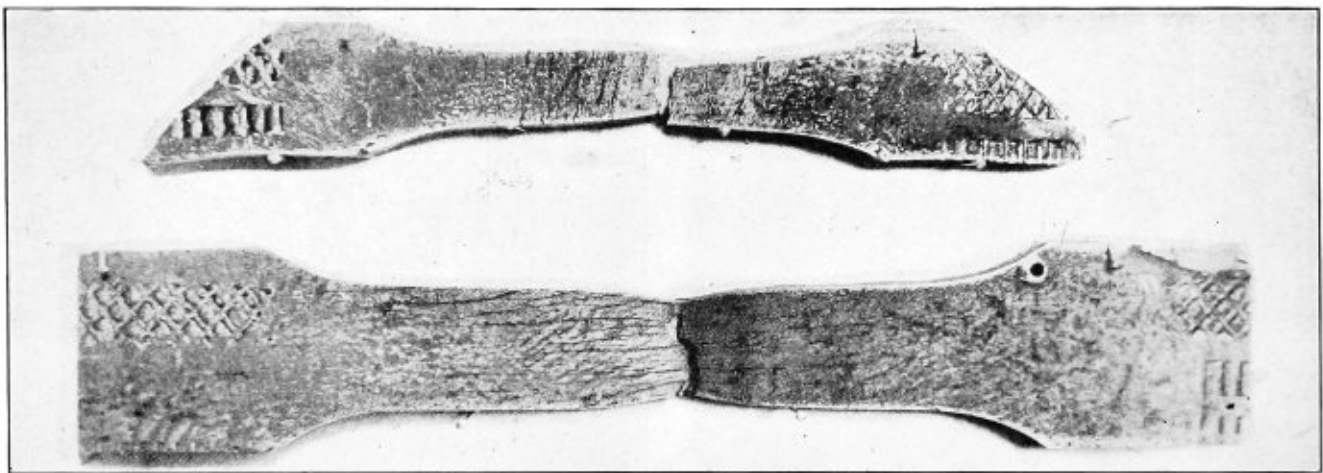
, Top—The test piece, after fracture, showing the water side; Fig. 13, Bottom—The test piece after fracture showing the firebox side of the sheet
